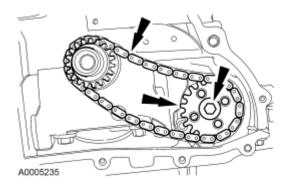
Locating Oil Pump Chain, Sprocket & Bolt Courtesy of FORD MOTOR CO.
